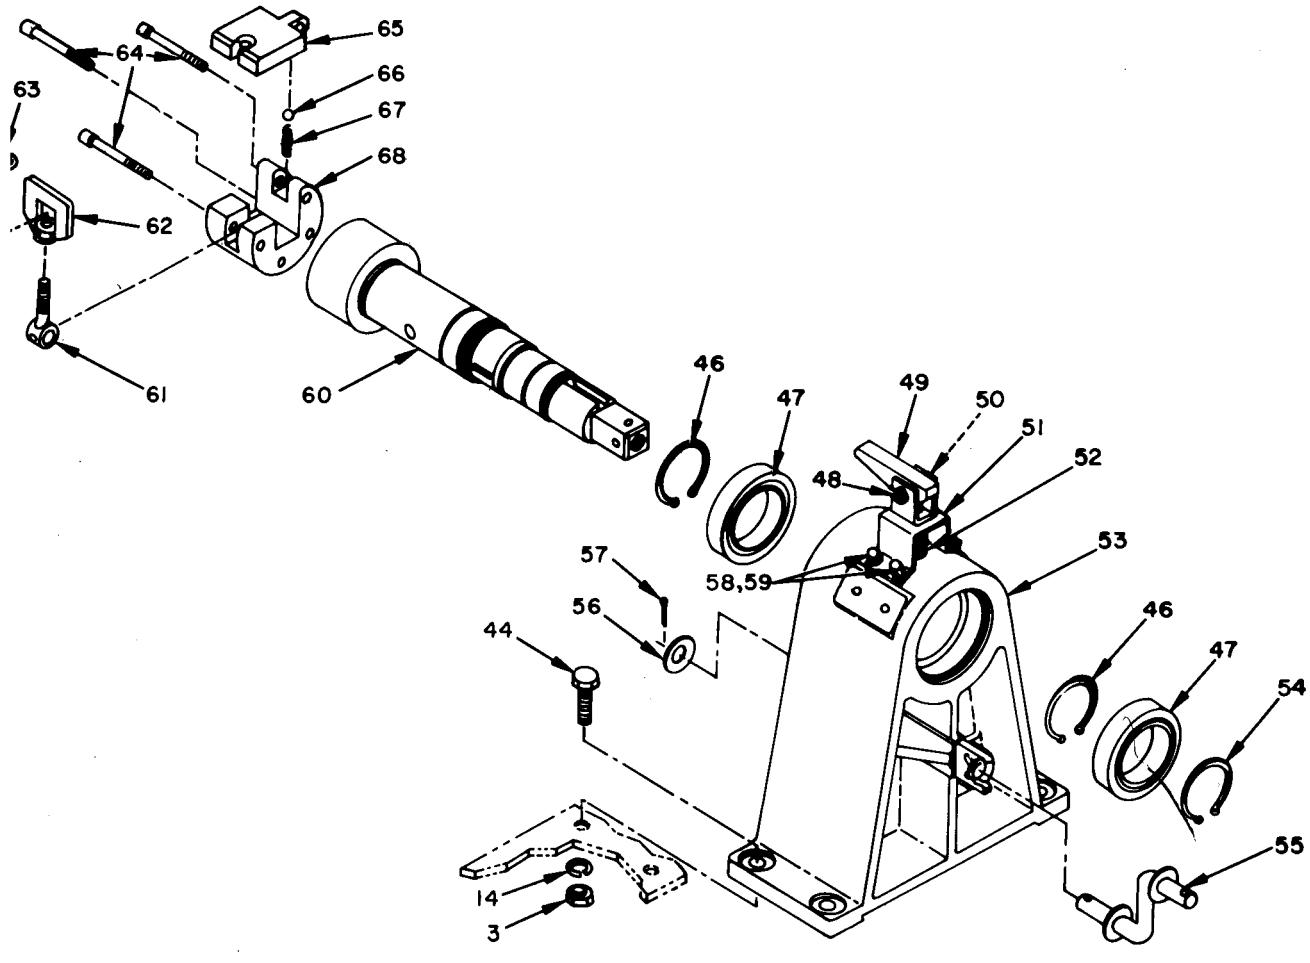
Clutch and Brake Assembly 1A1 (Sheet 2 of 2).
